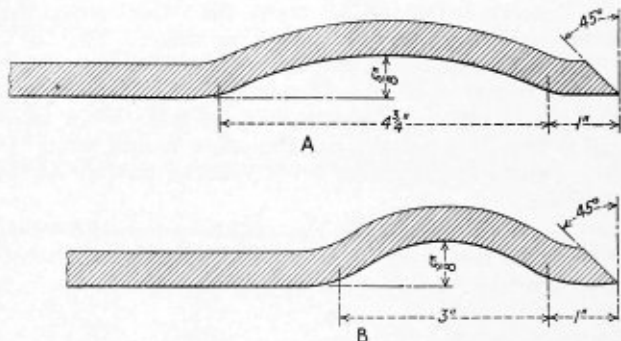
Standard Corrugations for Boiler Sheets and Patches
